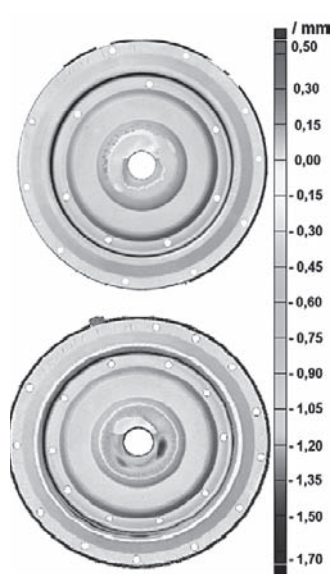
View of die with hybrid layer (CrN coating), obtained from optical scanner for bottom tool in second operation after forging: up – 3 000 units and down – 7 000 units
